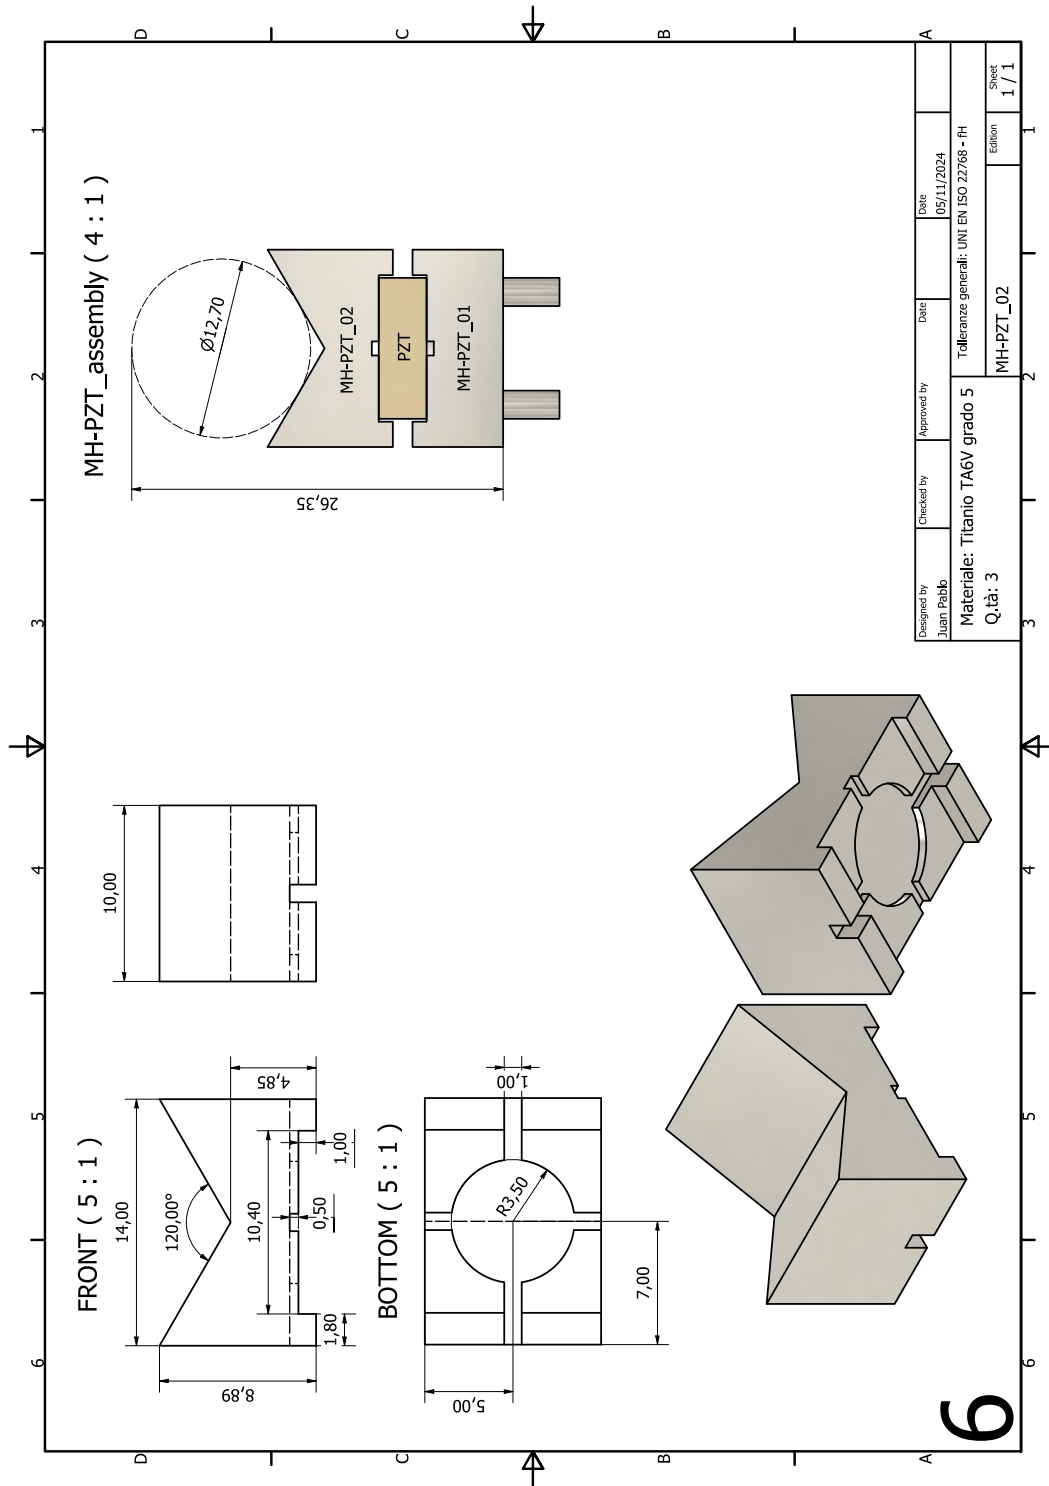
Technical drawing: top part of the composite mirror holder for the bow tie cavity.
